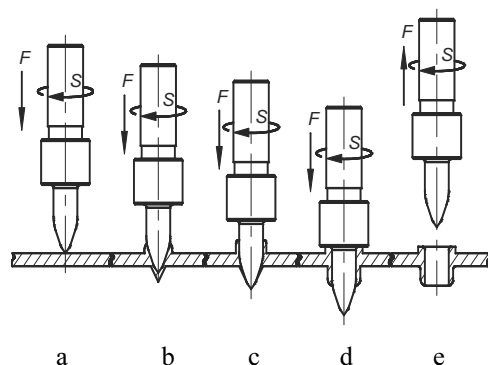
Friction drilling stages: a – initial contact; b – tool-tip penetration into the material; c – material flow and hole forming; d – bush forming; e – tool withdrawal
